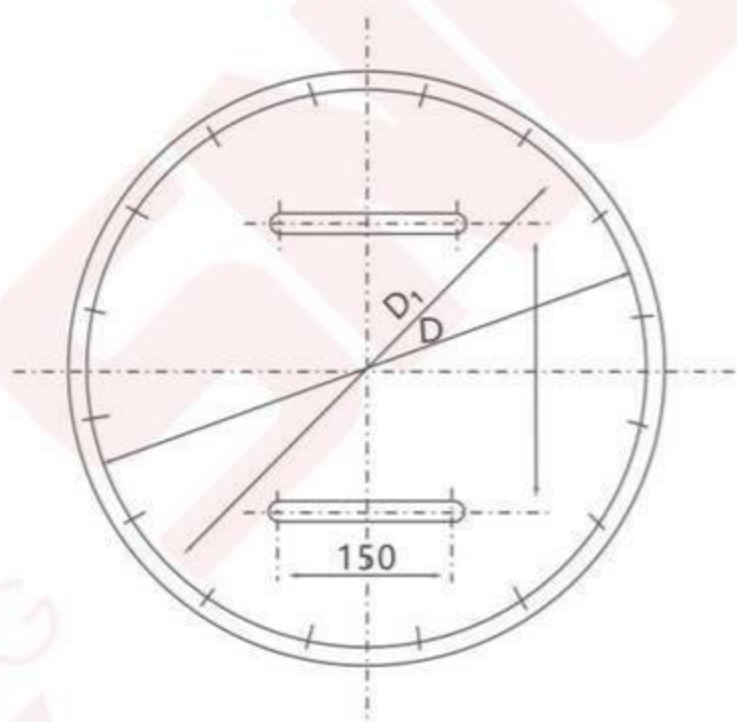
PLATE FLAT WELDED STEEL PIPE LARGE DIAMETER FLANGE
